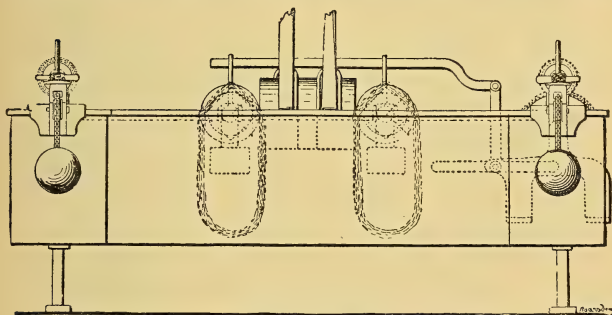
STEAM-POWER HANK-SIZEING MACHINE.
